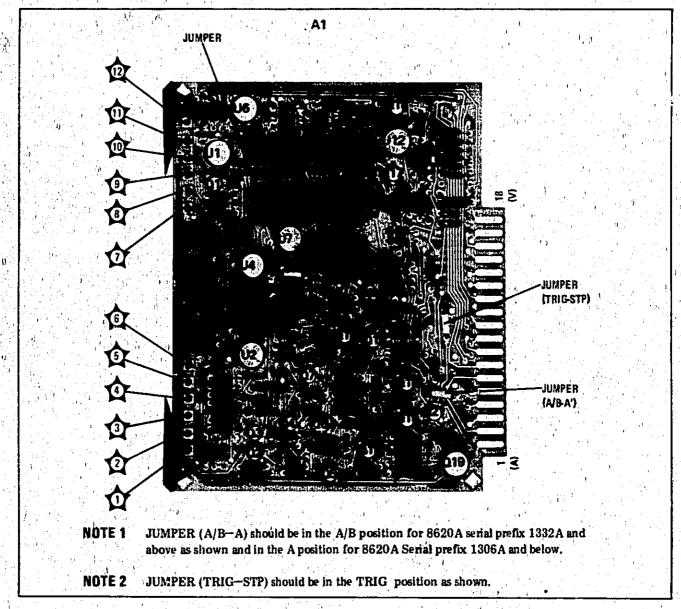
A1 Sweep Generator Assembly, Jumper Position
